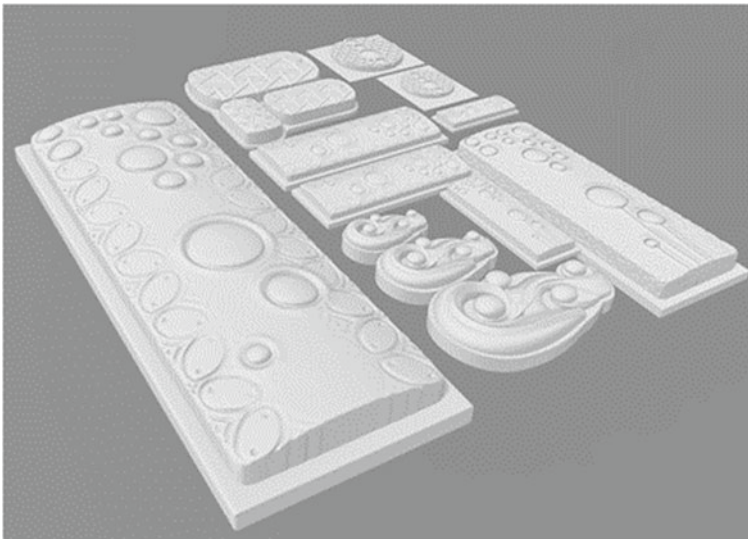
3D CAD master pattern of jewelry ceramic molds
